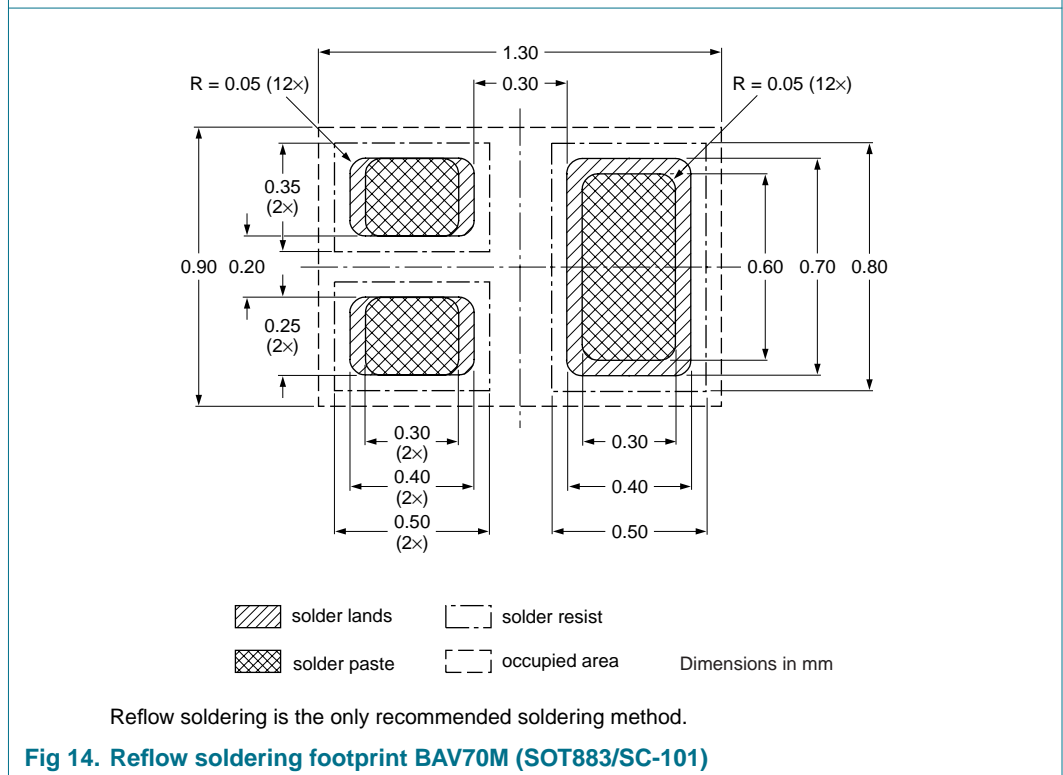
Reflow soldering footprint BAV70M (SOT883/SC-101)
